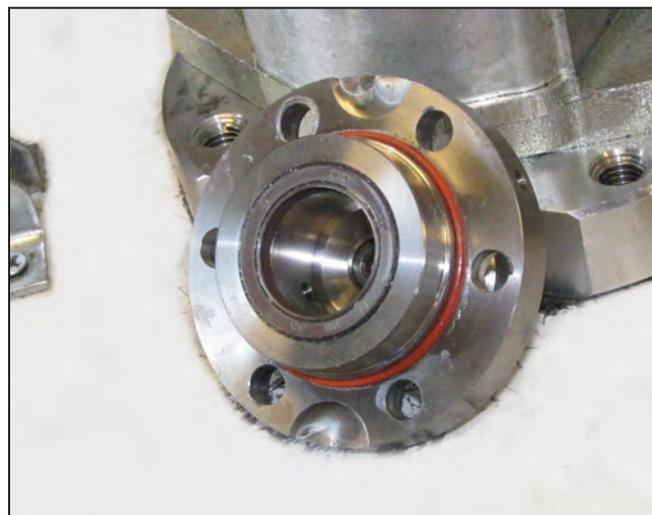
Inspect and grease the O-ring seal on the thrust housing cap.
